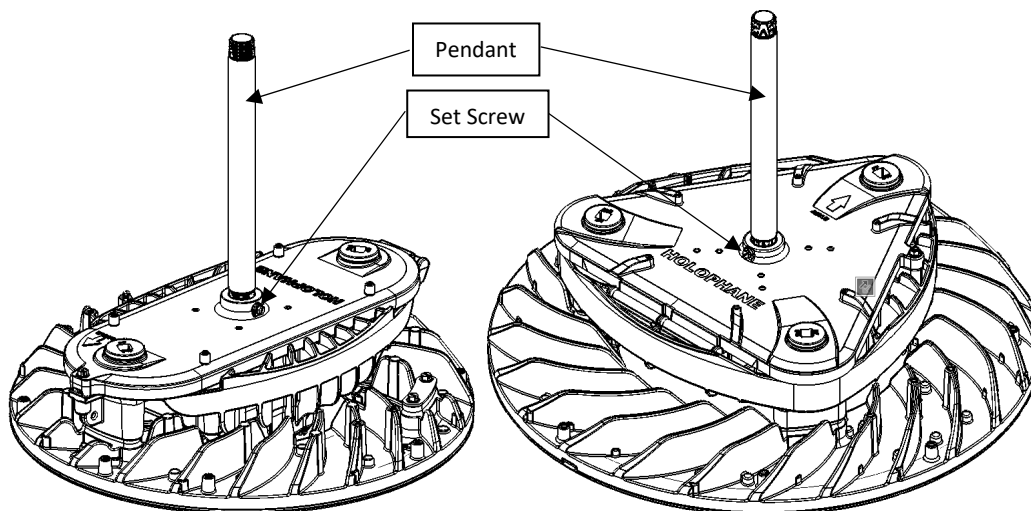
Pendant Mount for HOLO1 & HOLO2
